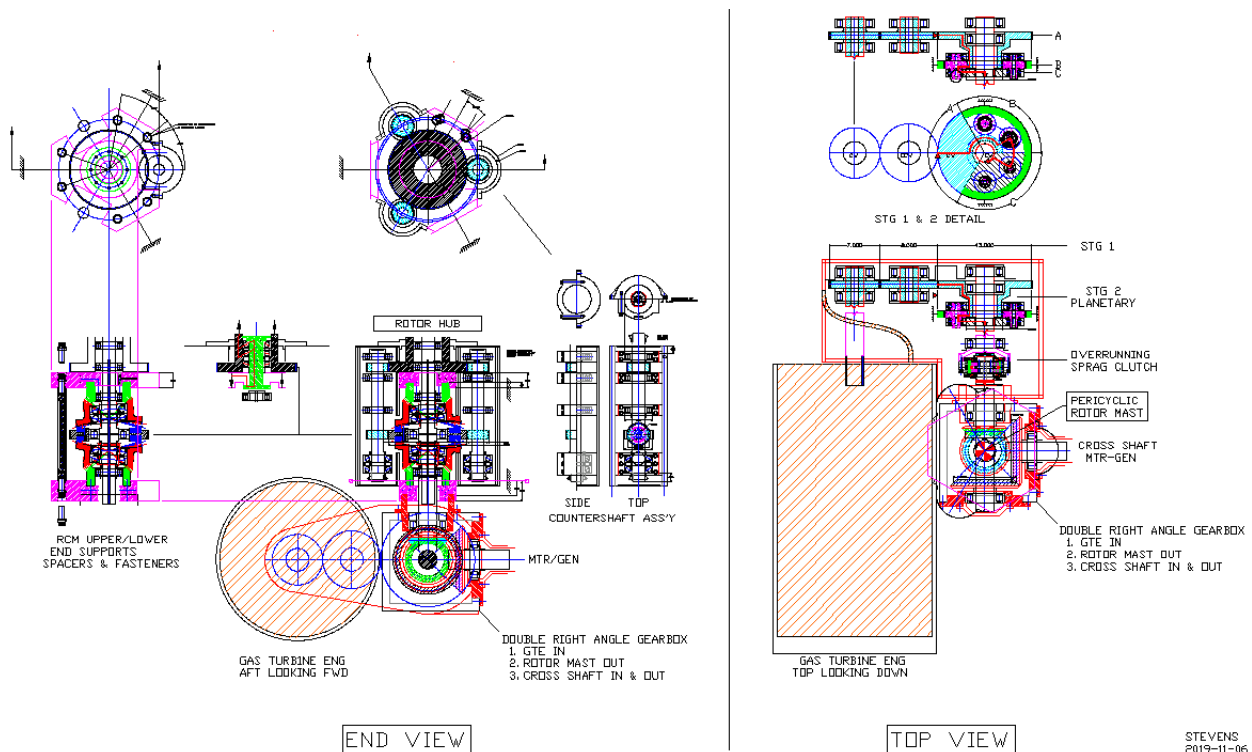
Engine reduction gearbox, double right angle drive gearbox (pericyclic rotor mast drive and cross-shaft drive).
